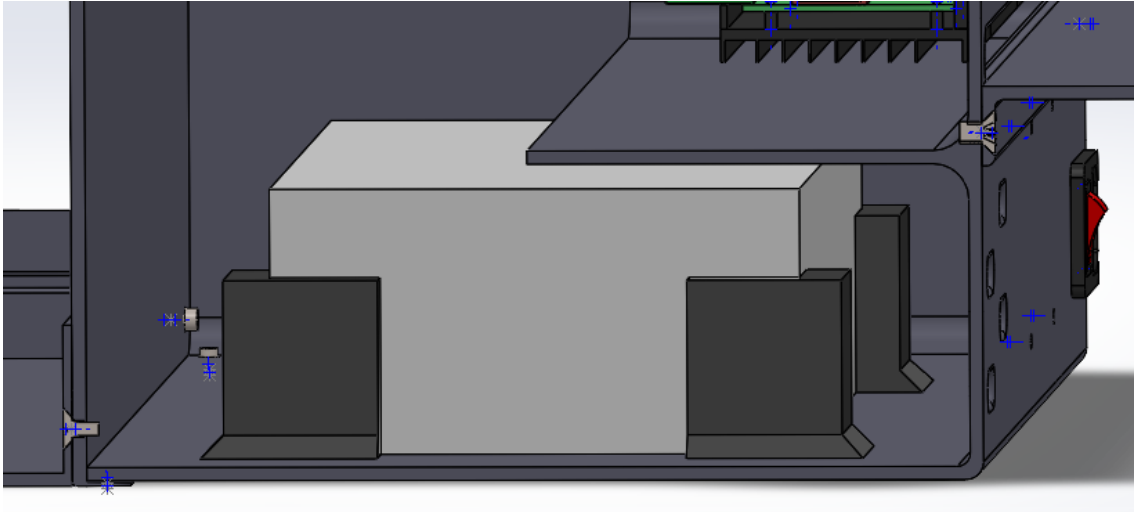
Power supply sliding in the lower part of the back assembly supported by rubber parts having adhesive connection with the base.
